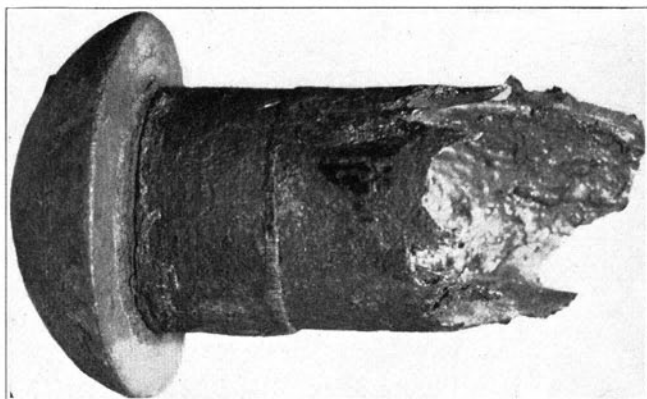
RIVET AND RIVET HEADS FROM EMBRITTLER BOILER
